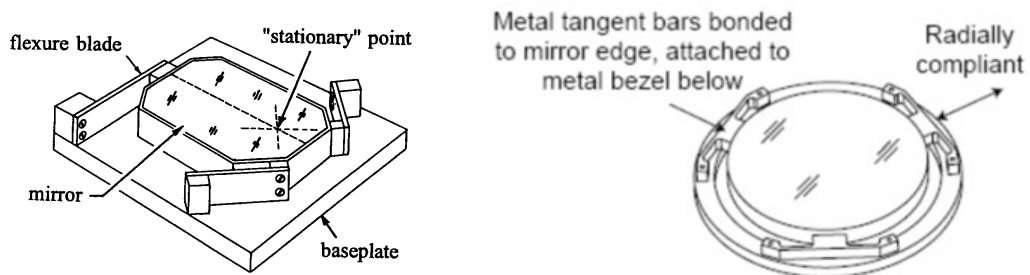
Concept for a flexure mounting for a cell-mounted rectangular mirror. (From Yoder.⁴)
